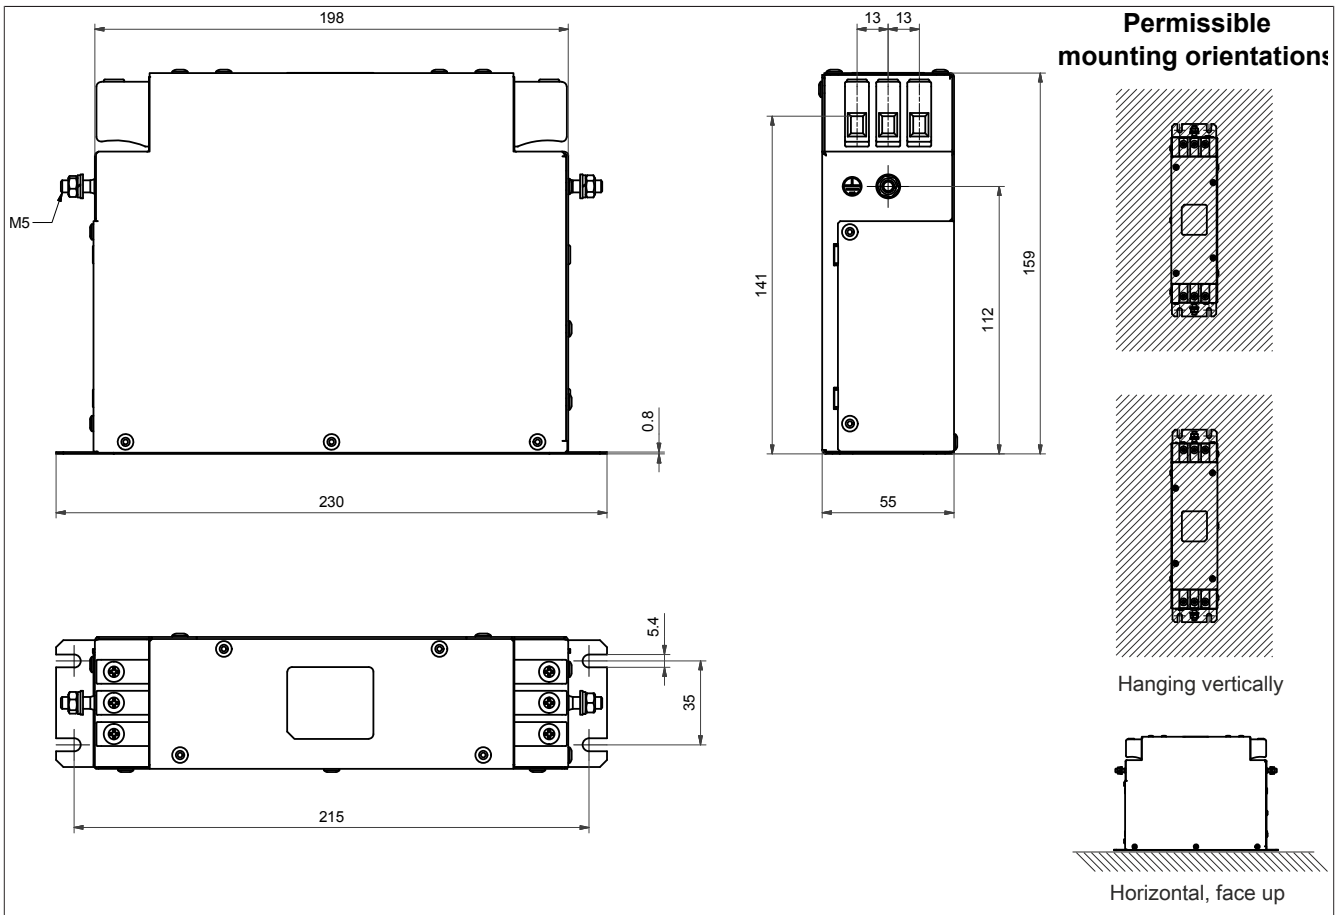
8EF0160H300.1-1 - Dimension diagram and installation dimensions
